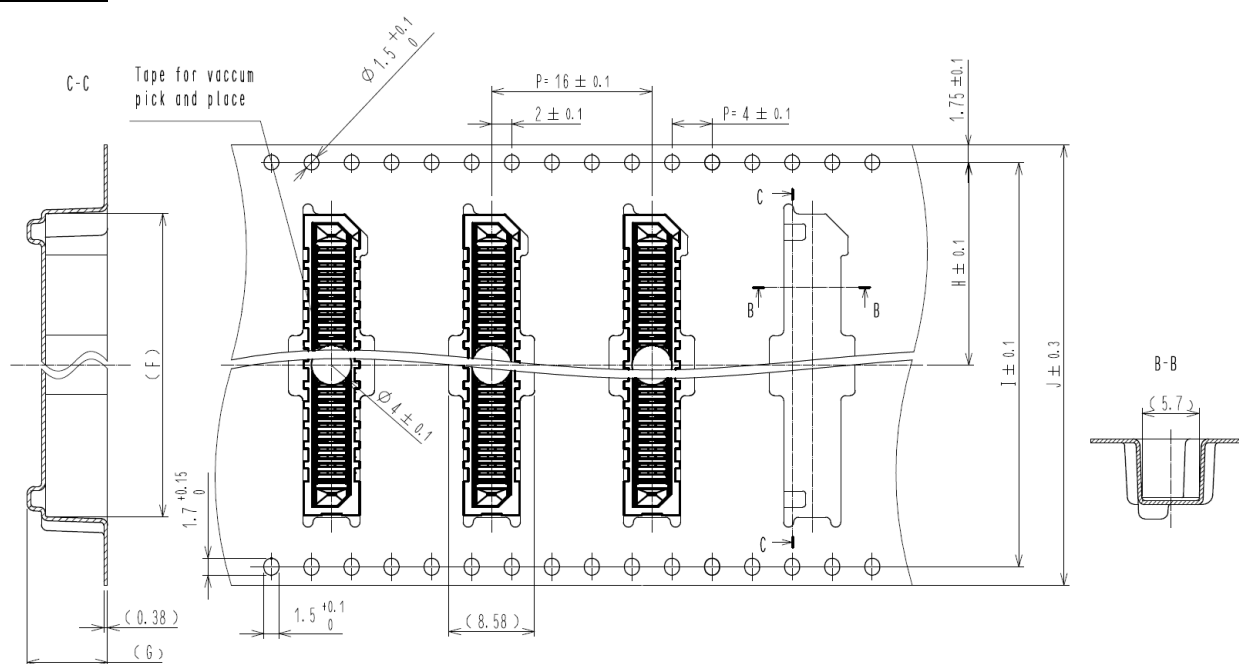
Embossed Carrier Tape for ER8 Straight Header
